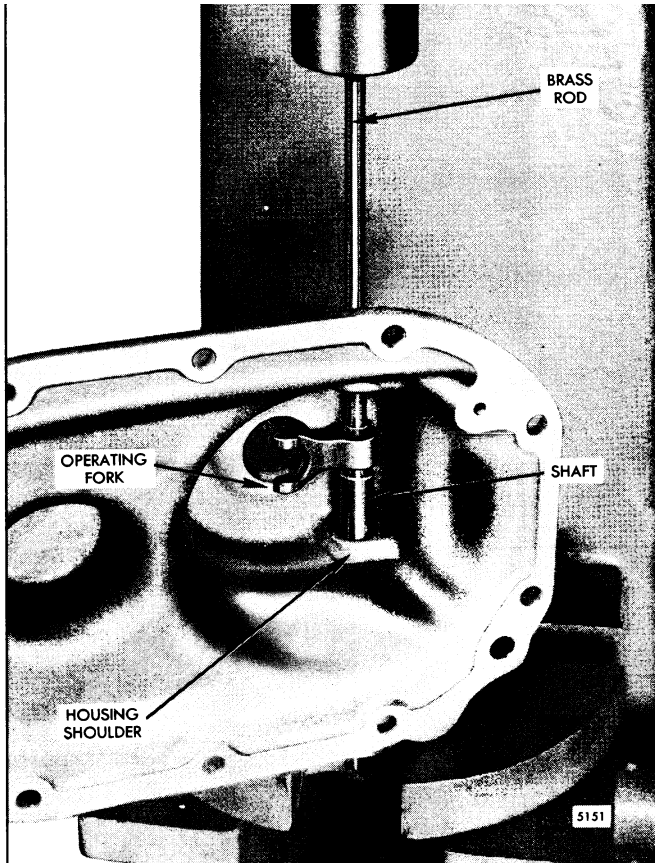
Removing Shaft From Lower Bearing and Operating Fork
